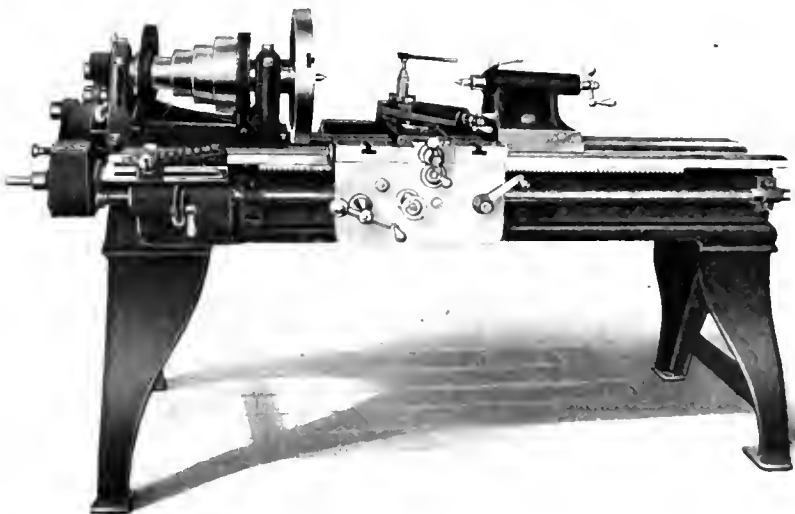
Carroll-Jamieson 14-inch Engine Lathe
